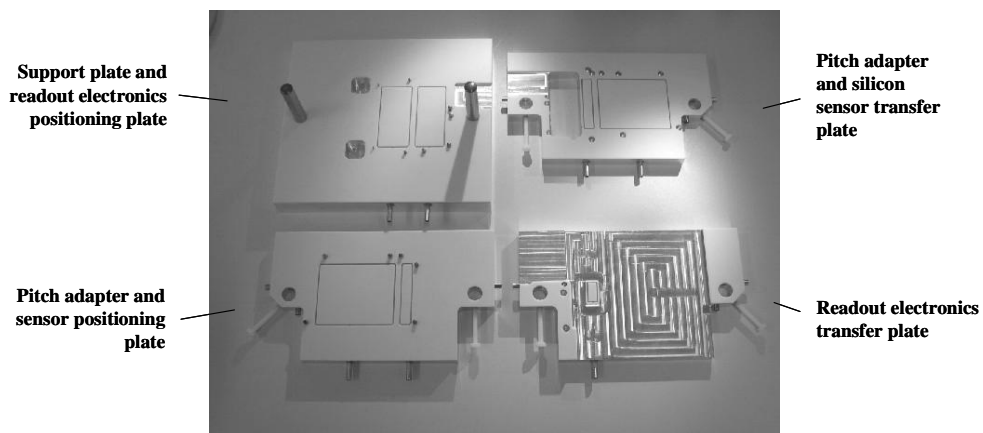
The assembly tooling for the module with a large sensor, which consists of two transfer and two positioning plates.
